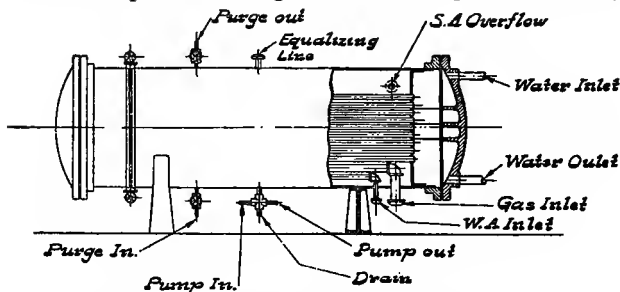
YORK HORIZONTAL TUBE ABSORBER.
